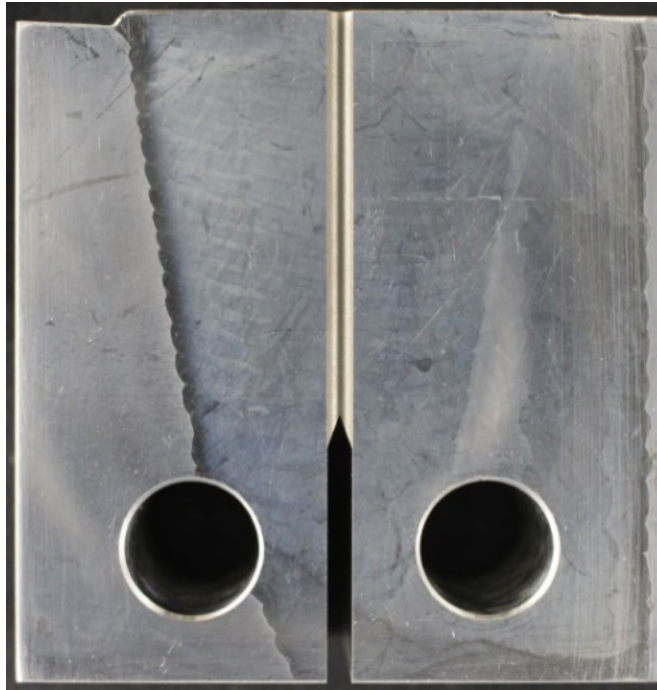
Specimen HHEP52M-TS-1 machined from the high heat input Alloy 52M weld produced by EPRI.
